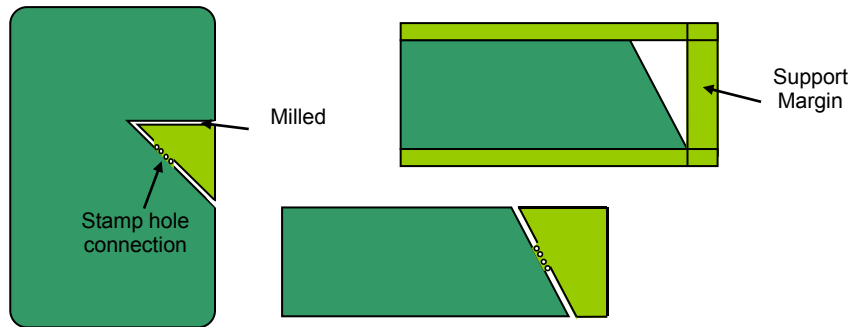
Simplification of the outline of irregularly shaped boards via the addition of filler pieces/margins.
